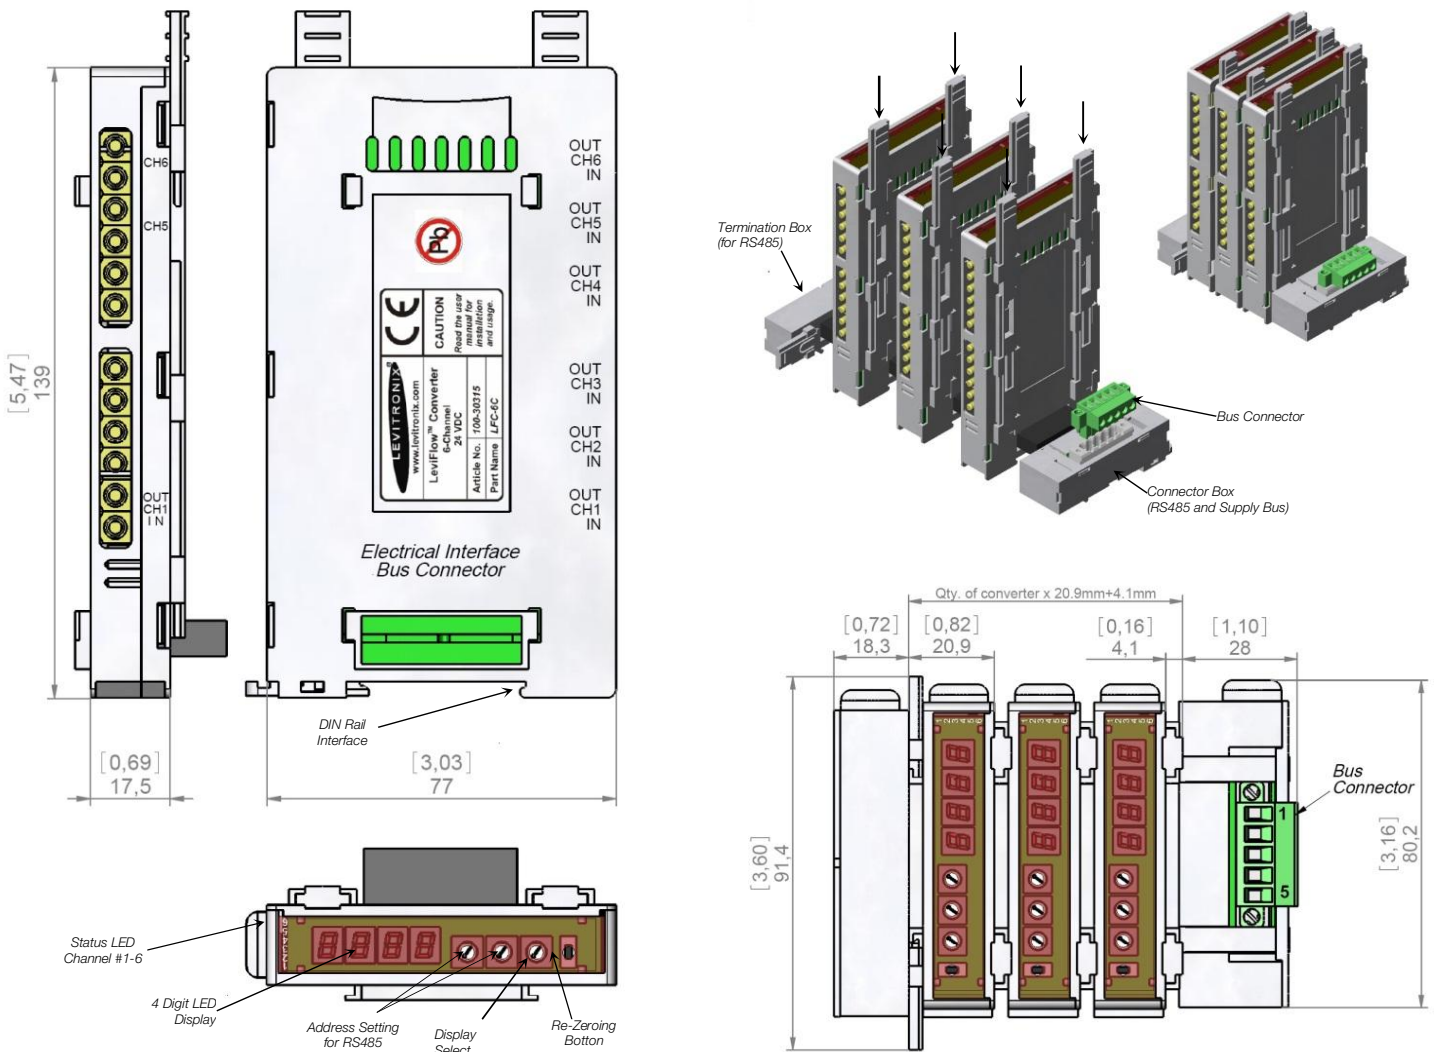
Dimensions, mounting and stacking concept for LFC-6C
